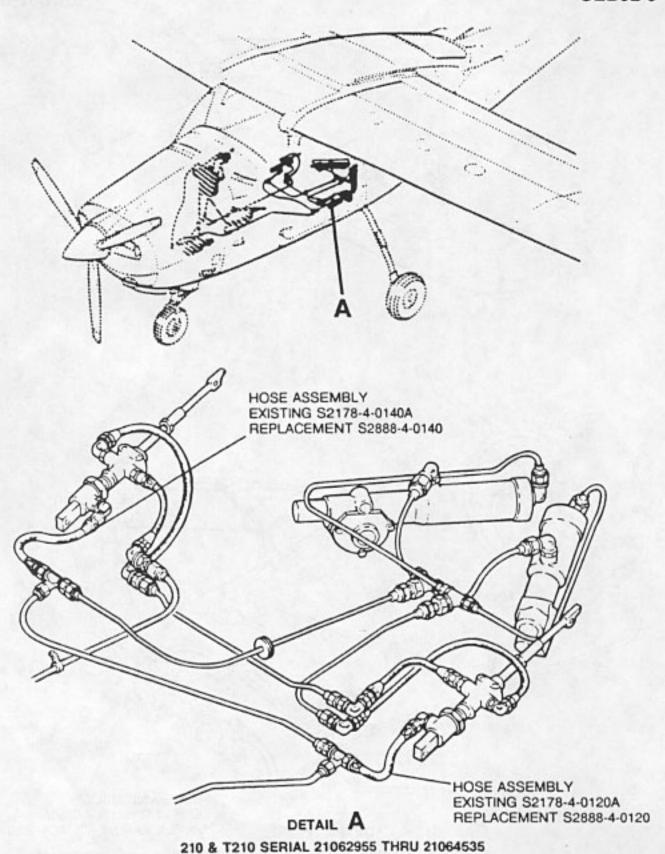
210, T210 Hydraulic Landing Gear Hose Replacement (Sheet 5)
